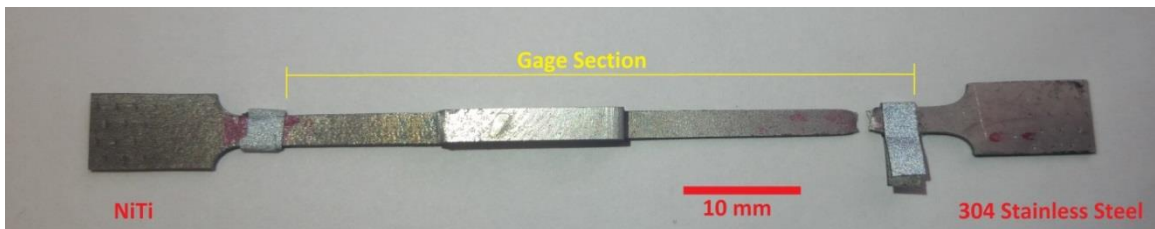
A view of the Weld 9 room temperature tensile specimen with the backing strip attached, after failure.
